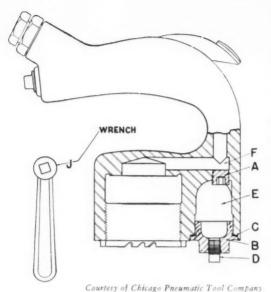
The built-in lubricator for C-P chipping hammers. To fill, remove filler plug "D" with wrench "J". "A" is the Regulating Plug. Screwed in snugly, it allows very slow seepage of oil past threads from oil chamber "E" into live-air port "F". Air in chamber gradually builds up to line pressure and fluctuations allow oil mixed with air to work out. "B" is Oiler Cap which must be screwed down tightly on gasket "C".
